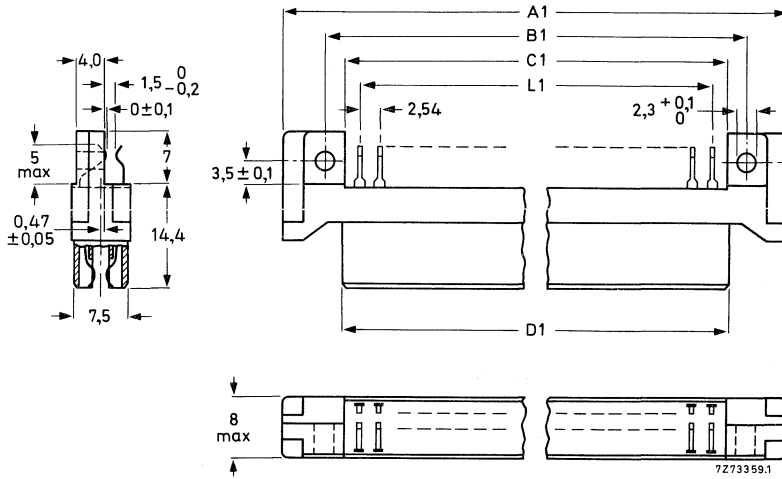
Female part with solder tags; see Table 2 for dimensions A1, B1, C1, D1 and L1.
